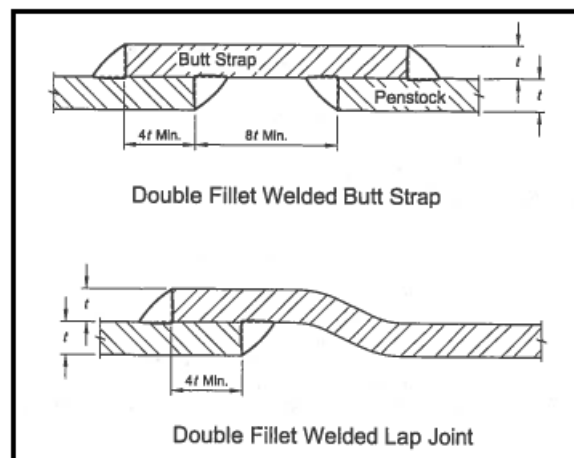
Typical Fillet Welds (ASCE Steel Penstocks)
